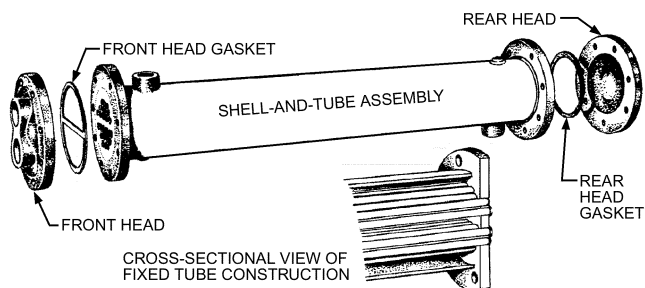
Exploded View of Straight-Tube Heat Exchanger
